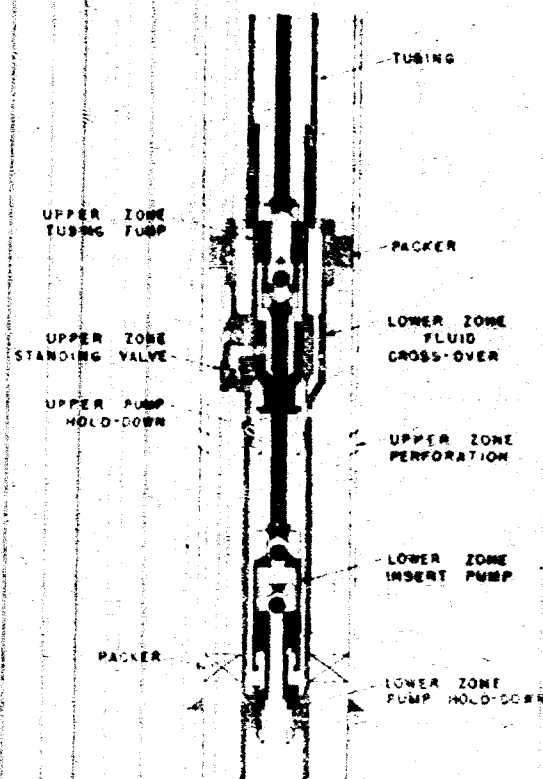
DOUBLE-PACKERS, SINGLE-STRING DUAL-ZONE-PUMP INSTALLATION WITH TUBING PUMP AND INSERT PUMP
